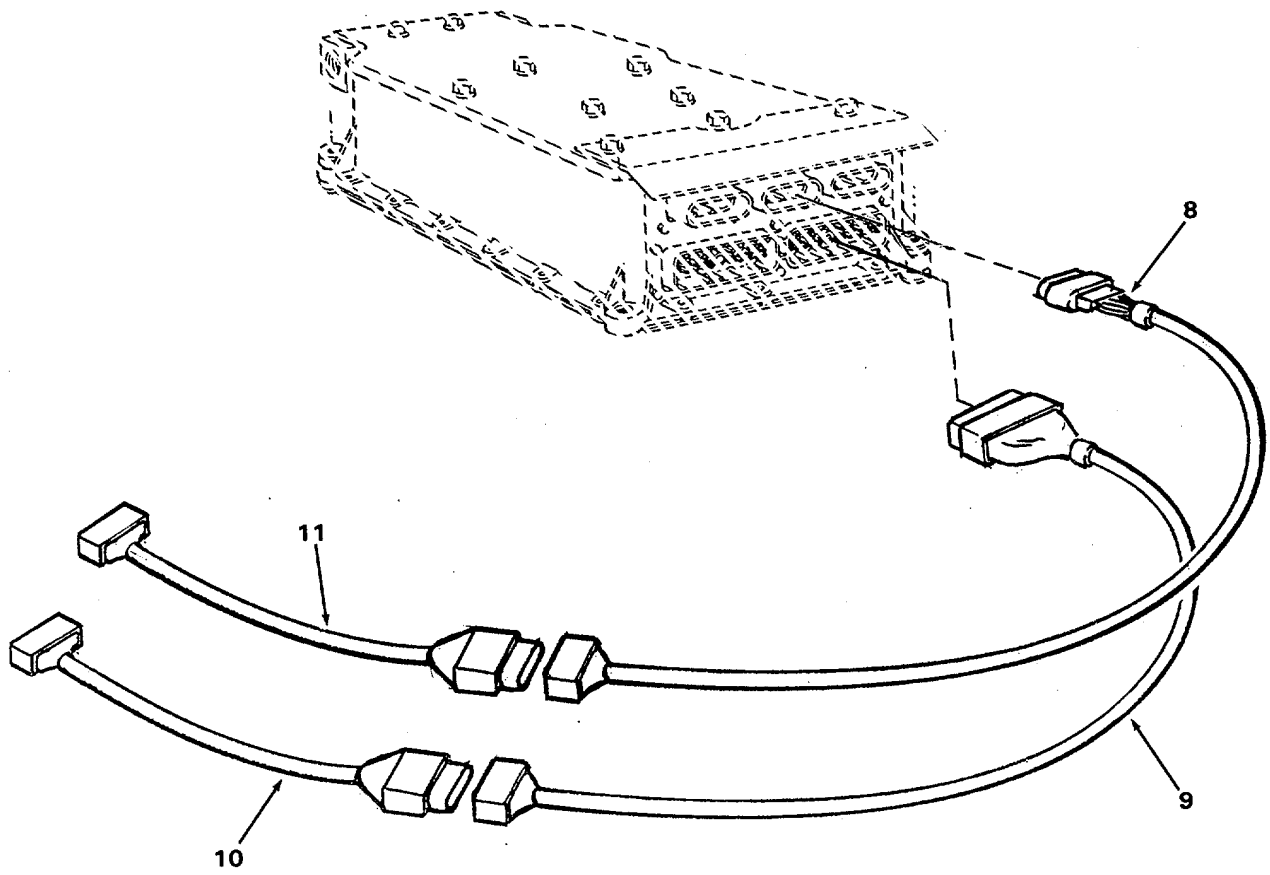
Electronic Control Wiring Harness, Sheet 2 of 2
